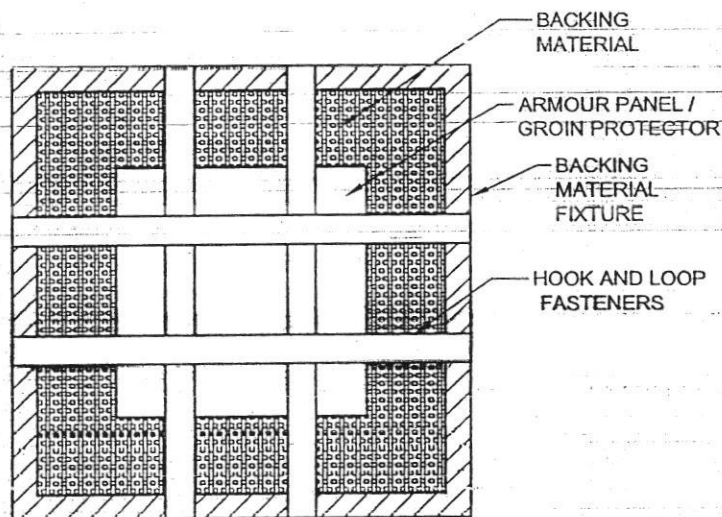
STRAPPING ARRANGEMENT OF PANEL
